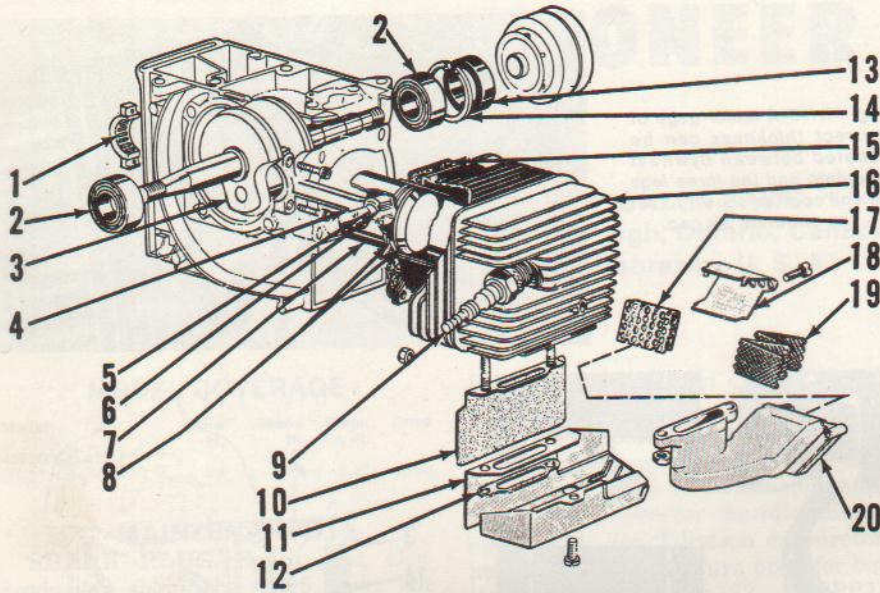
View of engine crankshaft, connecting rod and associated parts. Magneto end crankcase seal and bearing housing is shown in Fig. PR1-7.
